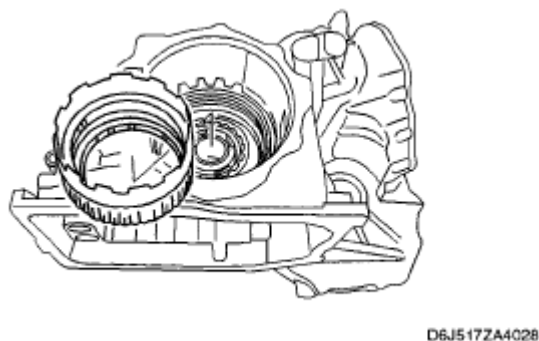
View Of Front Internal Gear And One-Way Clutch
